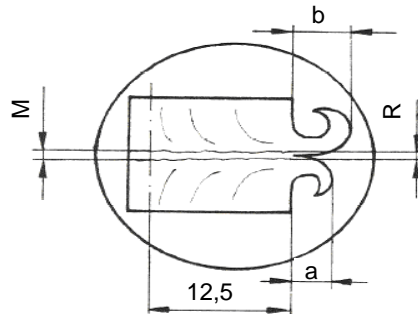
Scheme of flash size and HAZ width measurements in tested friction welded joints
